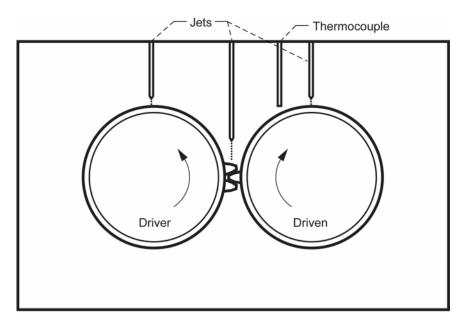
Spur gearbox showing jet and thermocouple placement. Each gear has twenty eight teeth, only a select few shown here.
